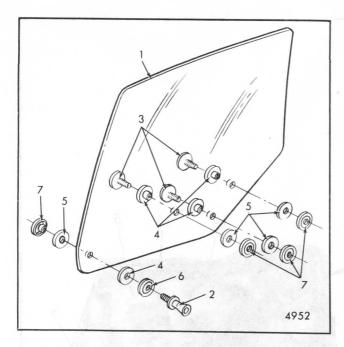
Rear Door Window Assembly - "A-29, 35" Styles
